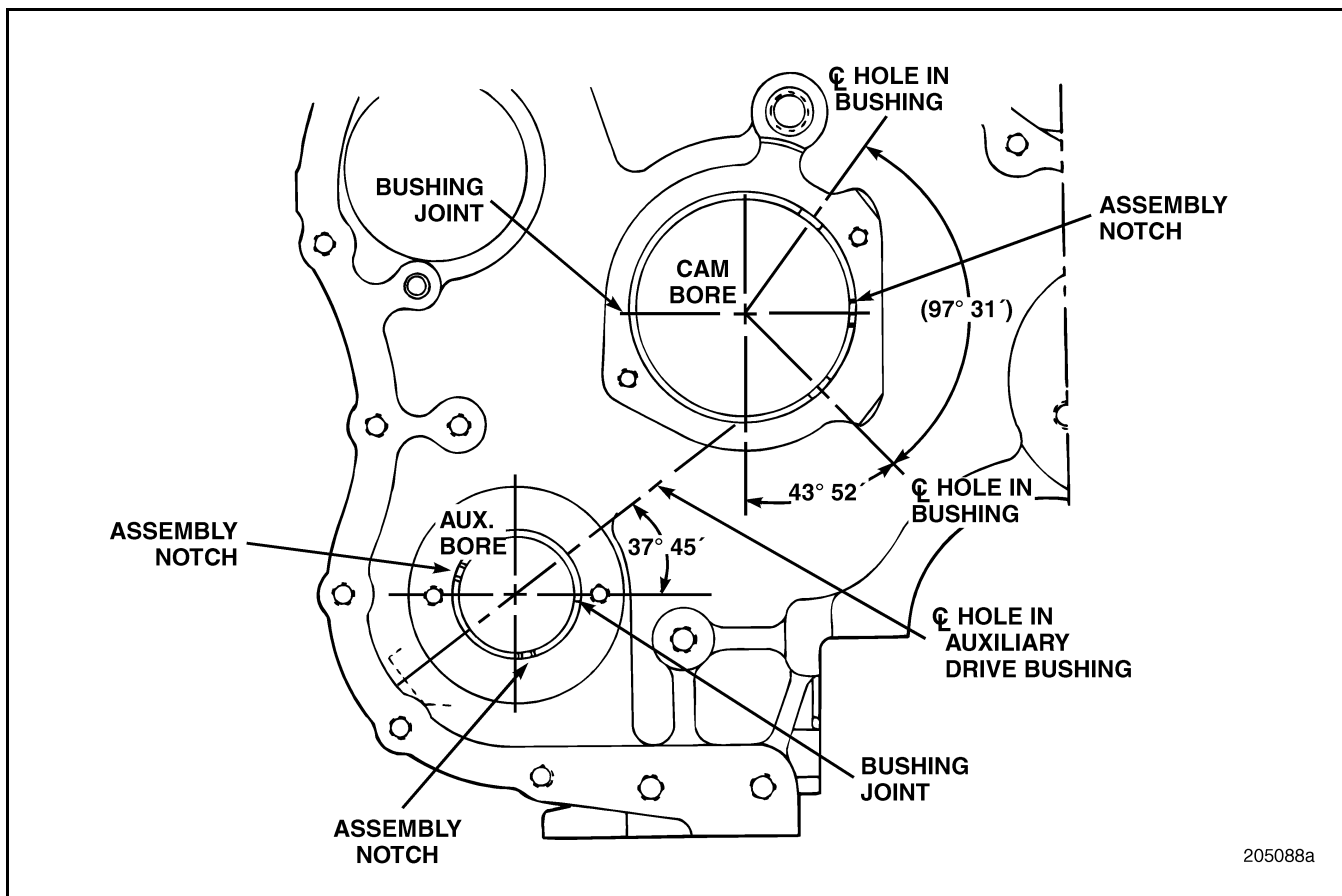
Front Camshaft and Auxiliary Shaft Assembly Notch Locations
